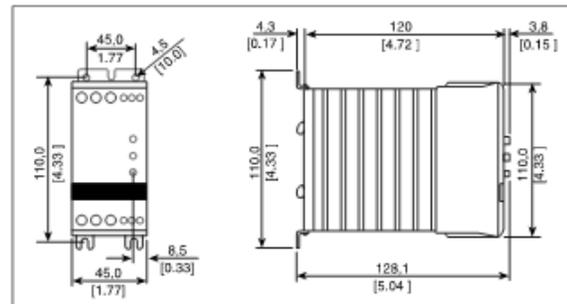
Approx. Dimensions in mm [inches] — S701\_15
